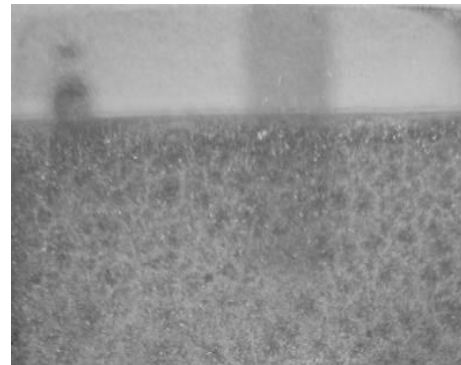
View of cross-section of bimetallic low-alloyed cast iron casting with enriched surface by austenitic steel plate about thickness 5mm
